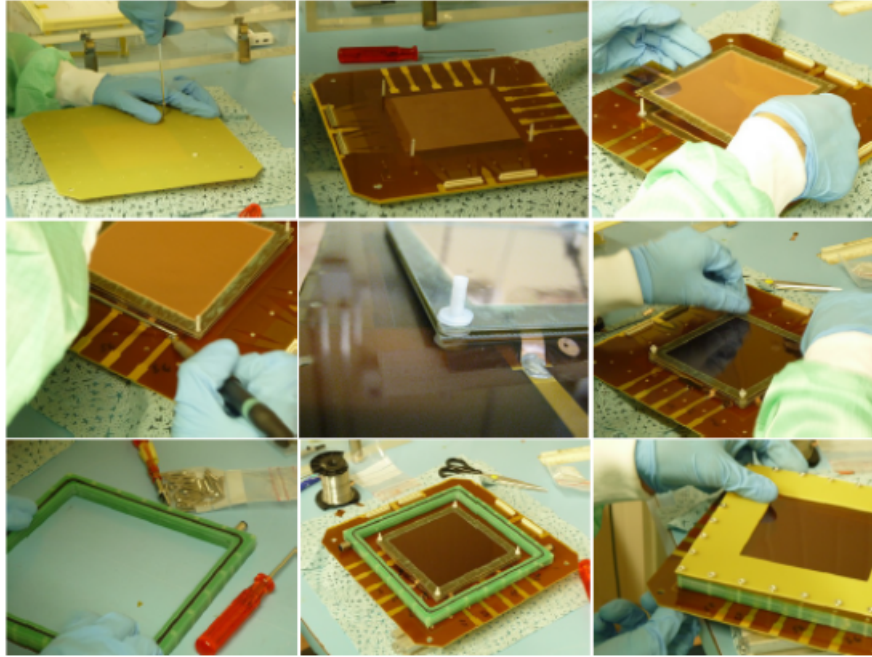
The first steps in triple-GEM prototype’s assembly. The readout printed circuit board and the GEM electrodes are combined.
